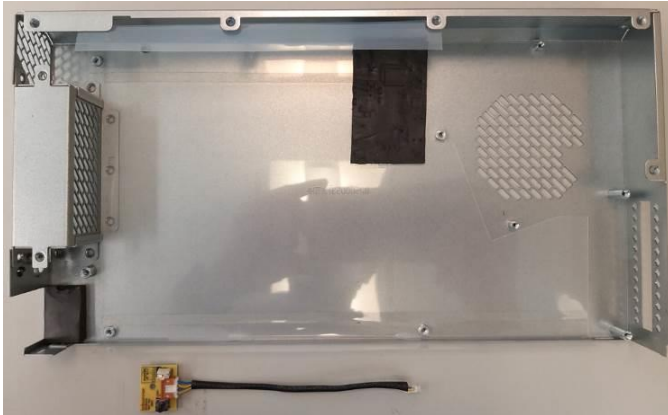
Remove bottom Mylar and two pads from bottom chassis.
